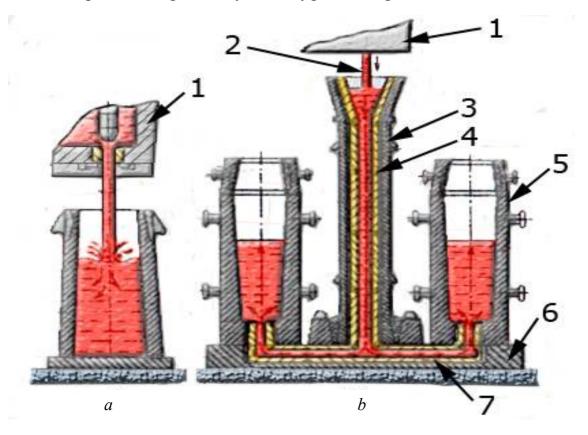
Normal ingot making: a – top casting; b – uphill teeming; 1 – ladle; 2 – liquid steel; 3 – central gate; 4 – pipe lining; 5 – ingot; 6 – bottom plate; 7 – fused channel
